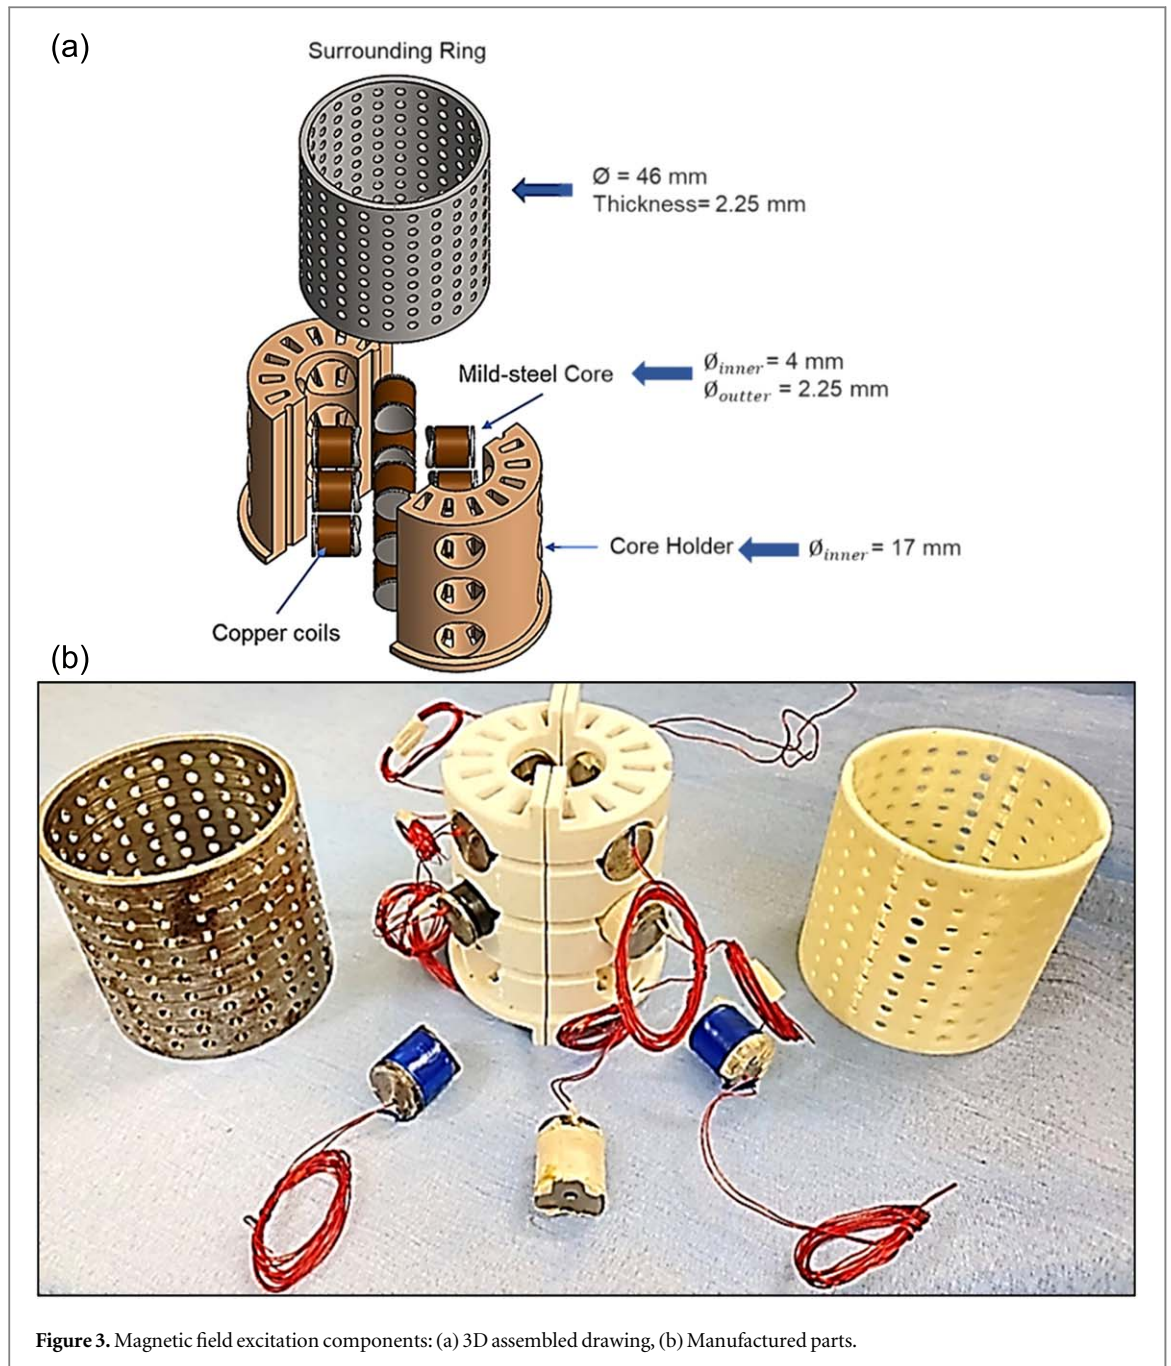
Magnetic field excitation components: (a) 3D assembled drawing, (b) Manufactured parts.
